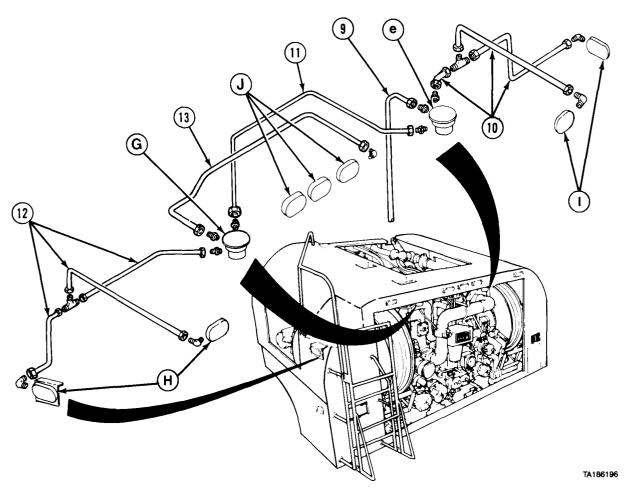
Electrical Conduit Tubing (Sheet 2 of 2).
